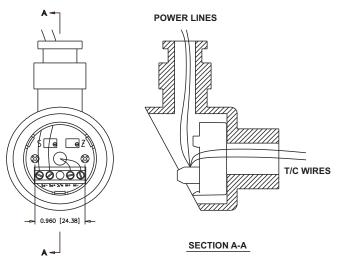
Assembly of the Transmitter inside an NB2 Protection Head
